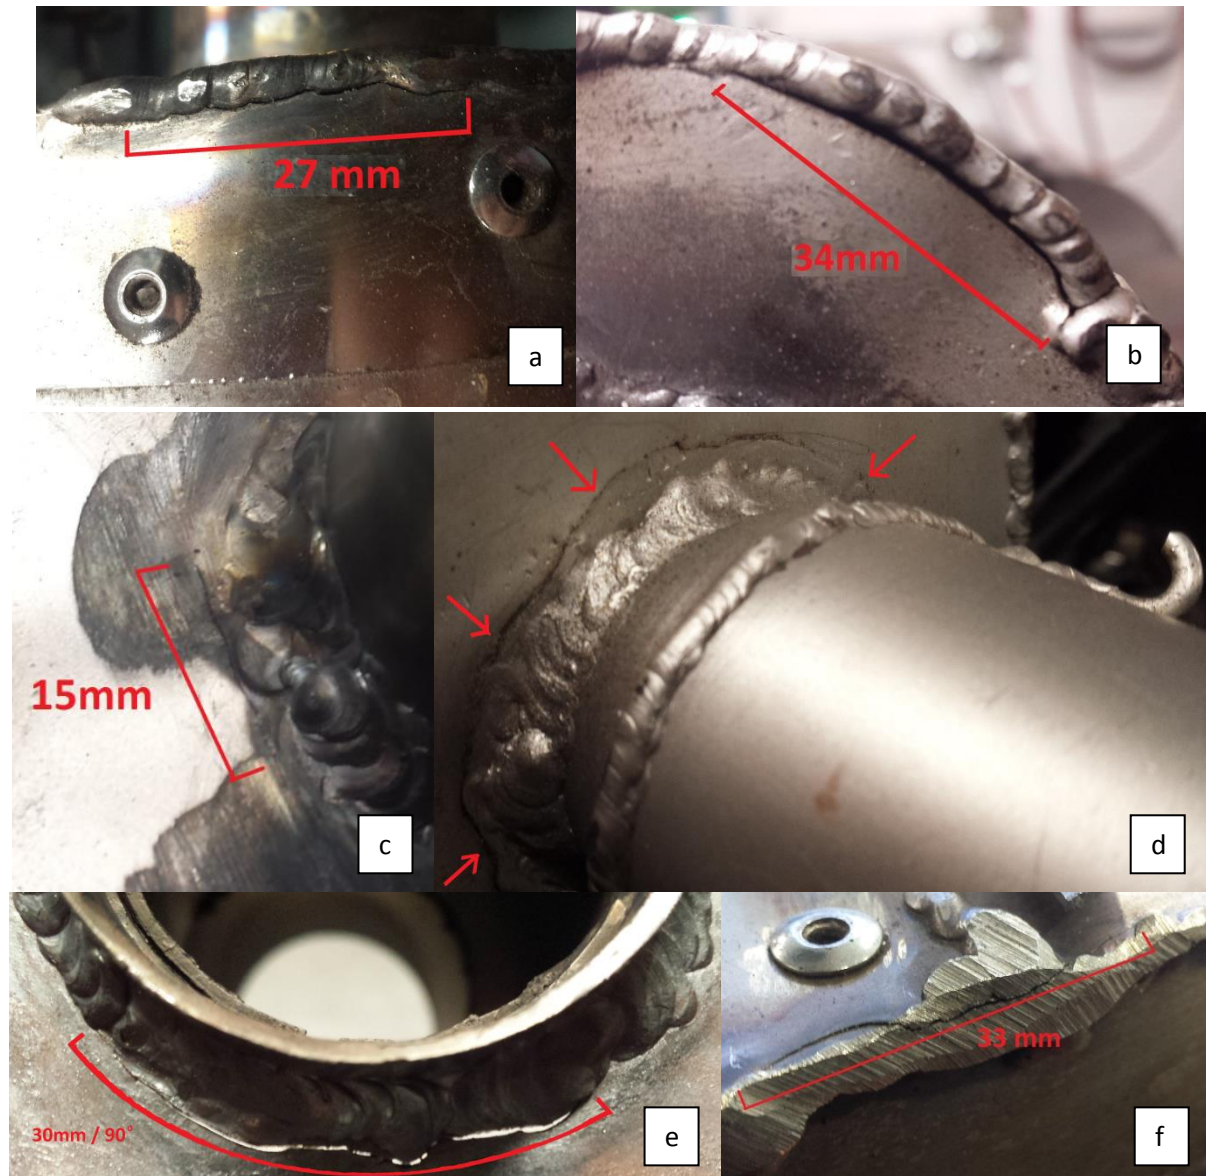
Various sizable cracks formed at welds. (a): Stainless steel endcap strip to bulkhead. (b): Mild steel endcap strip to bulkhead. (c): Mild steel endcap to outlet tube. (d): Mild steel inlet reducer to endcap. (e): Same crack as d, shown from inside. (f): Stainless steel endcap strip to bulkhead.
